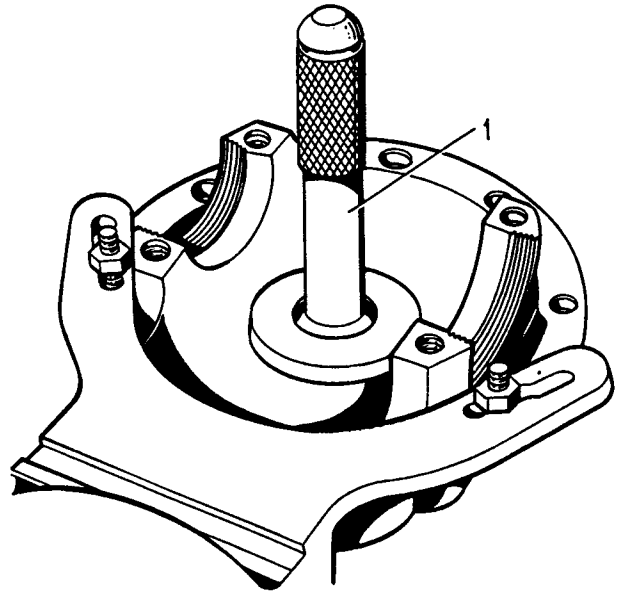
Installing Drive Pinion Rear Bearing Outer Cup:
